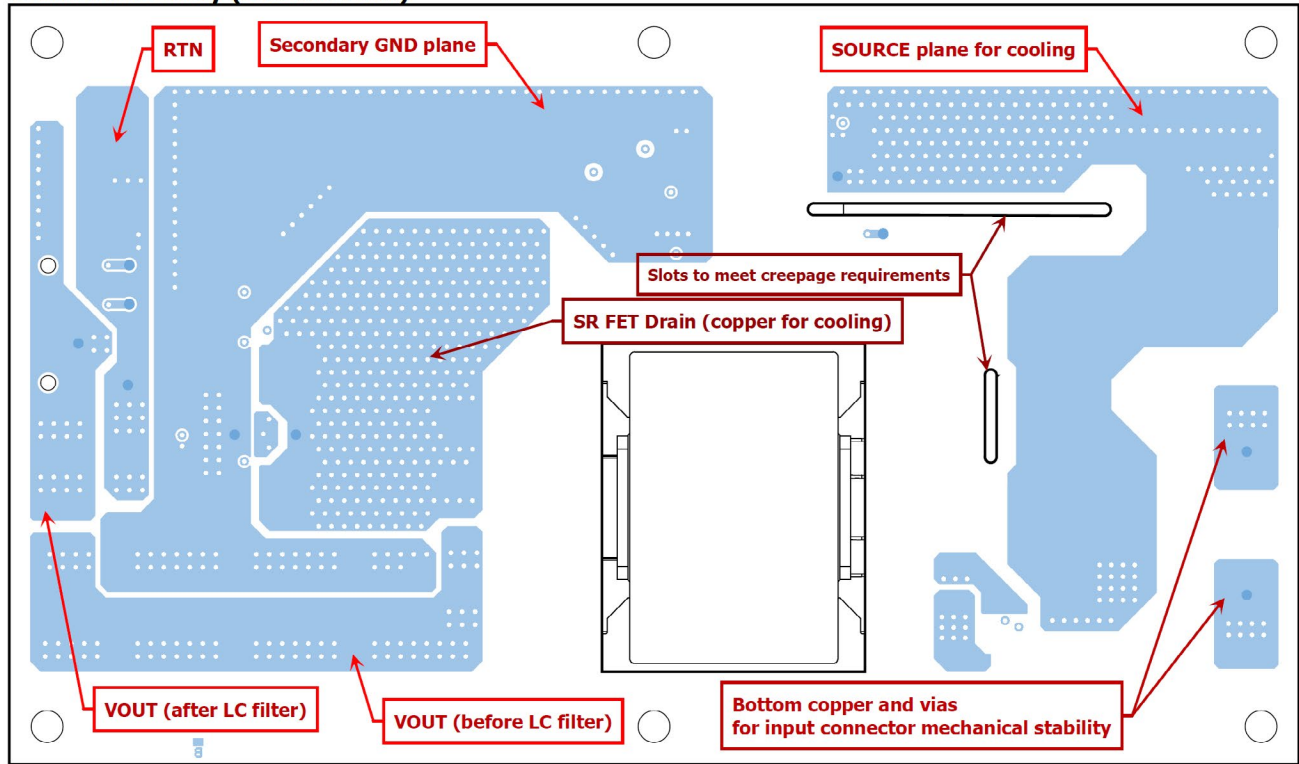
Layout Example for Design with Top Assembly Only (DER-948Q - Bottom).
